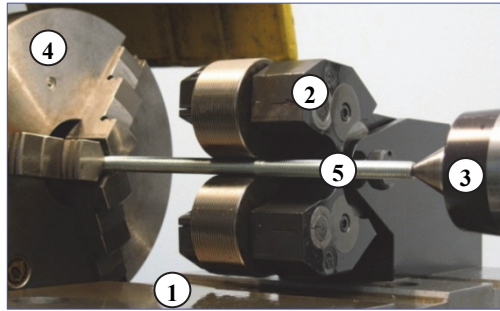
View of the stand for tangential thread rolling method: 1 – mounting plate, 2 – head type T27, 3 – tailstock, 4 – jaw chuck lathes, 5 – rolled rod
